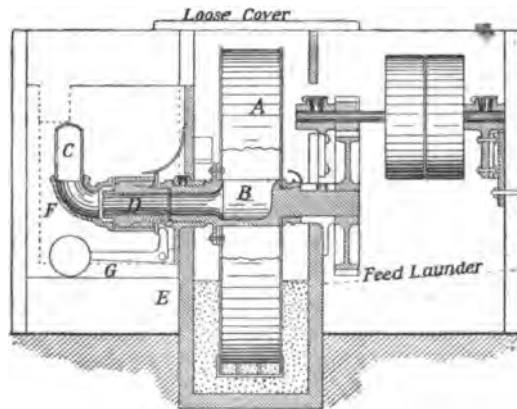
Frenier Sand Pump; End Sectional Elevation.
